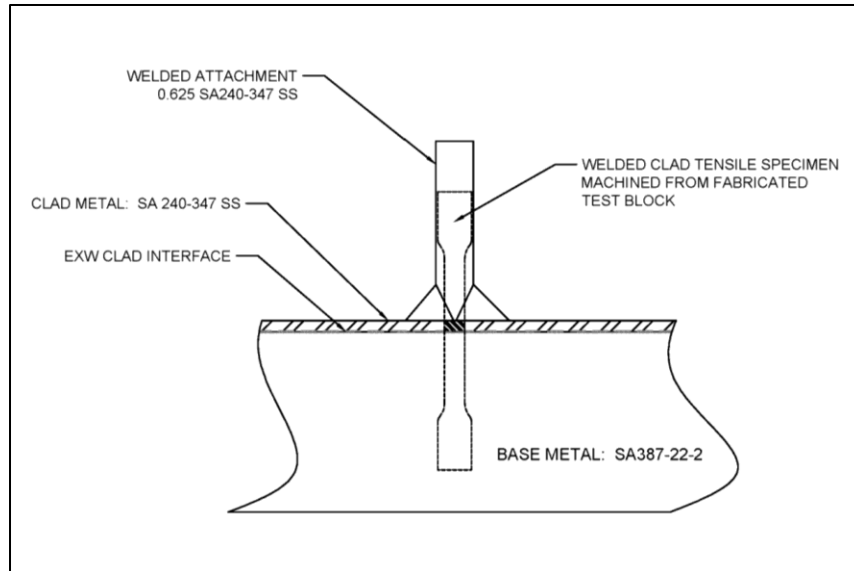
Fabricated Test Block with Attachment Welded to Explosion Clad Material
